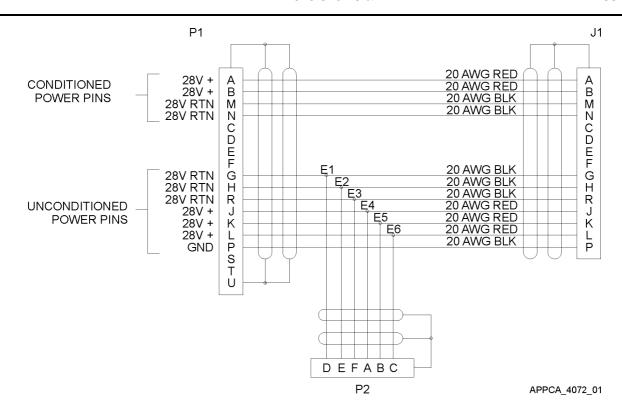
P/N 881279 W1 Power Cable Wiring Diagram
